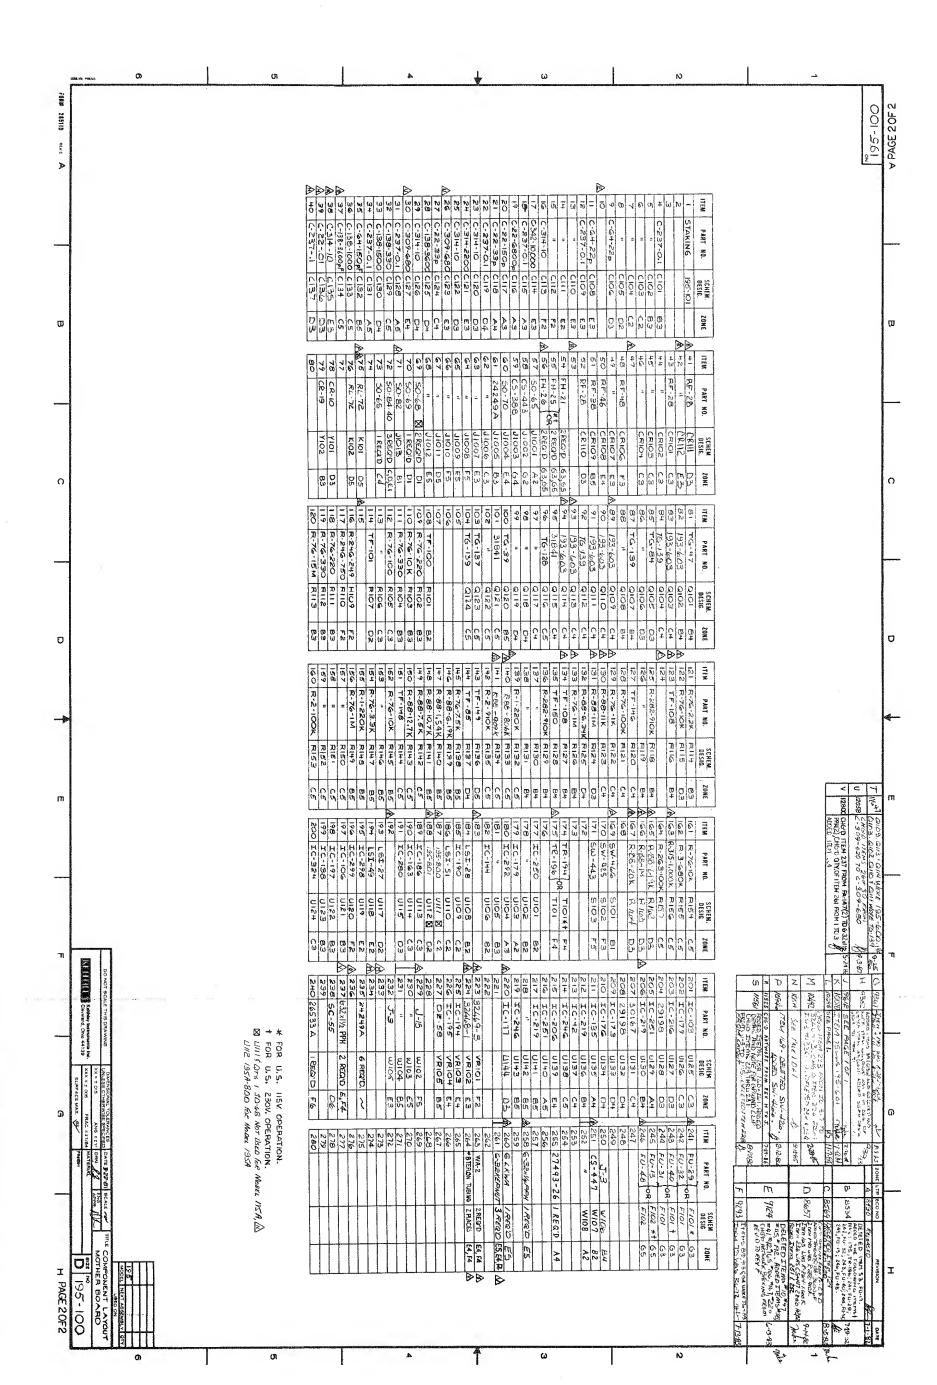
Mother Board, Component Location Drawing, Dwg. No. 195 -100 (sheet 2 of 2)
